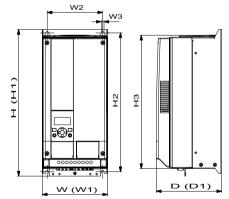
Vacon 20 dimensions, MI4 - MI5
